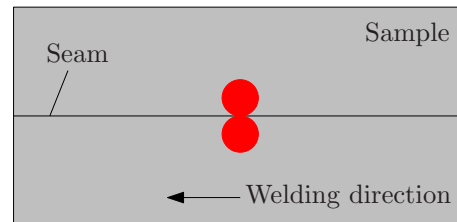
Laser spot placement in the parallel twin spot welding configuration.
